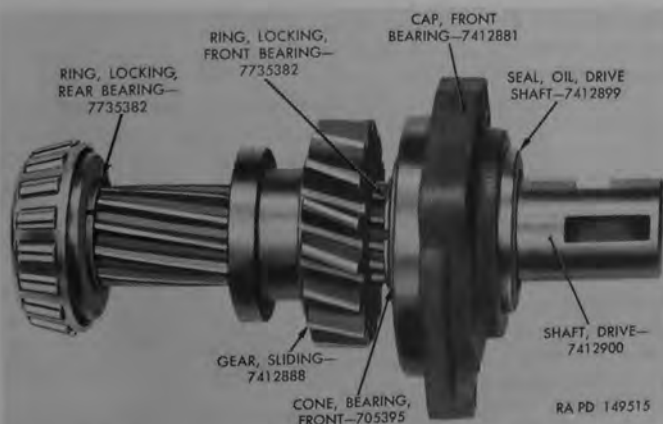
Drive shaft, sliding gear, and bearings assembled.
